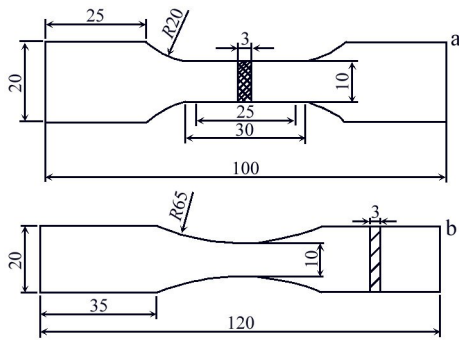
Size of tensile specimen (a) and fatigue specimen (b)
